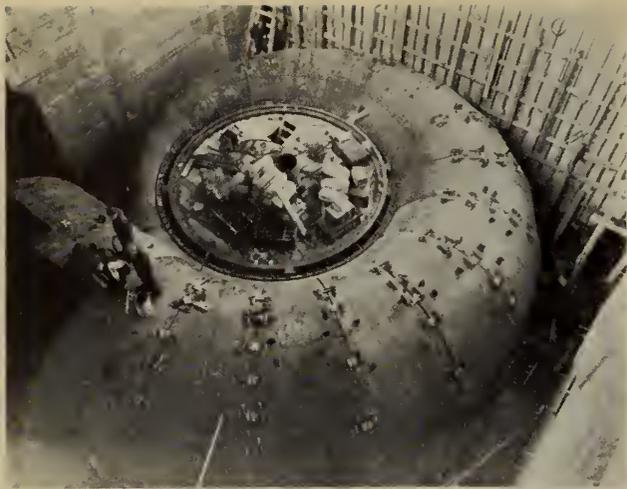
View of main turbine scroll-case in process of being welded.
